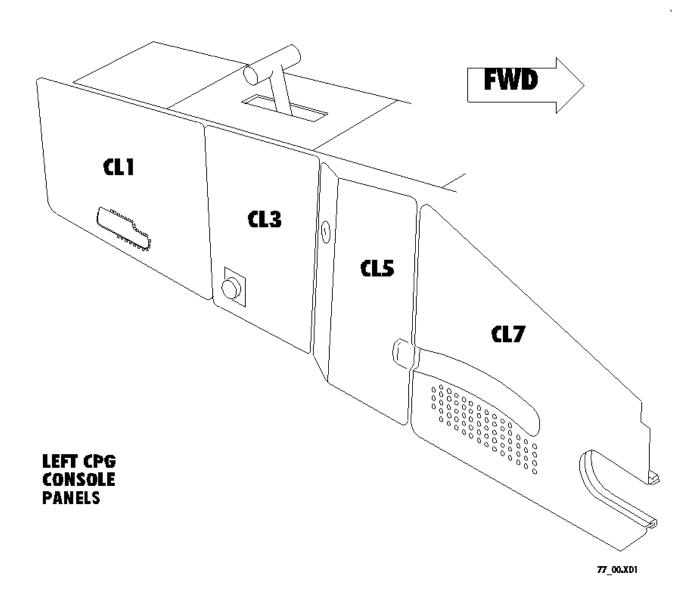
Inspection Access Provisions (Sheet 6 of 8)
